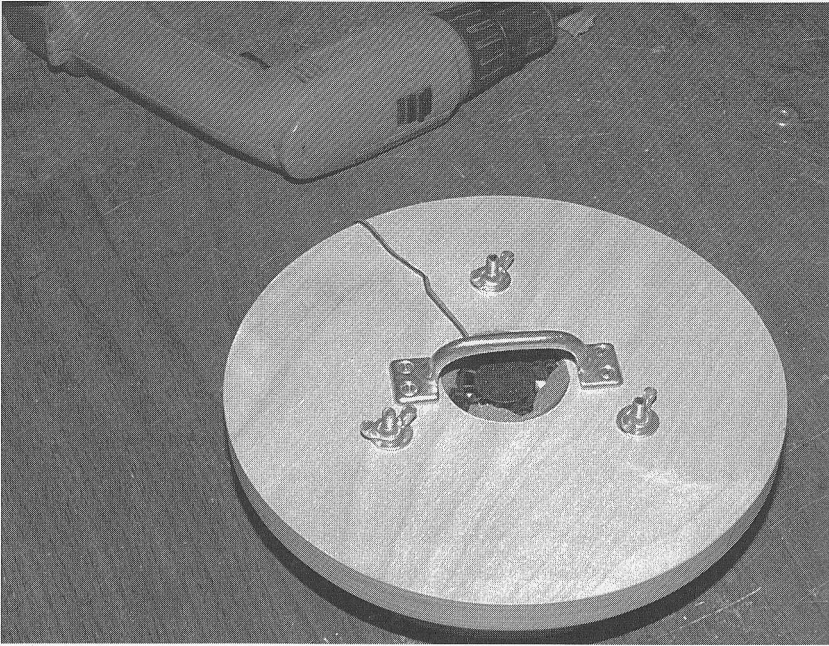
The handle attached to the bottom of the mirror cell makes it easier to install the cell in the telescope, and it gives you a secure place to hold the tube. Note the fan mounted under the handle.
